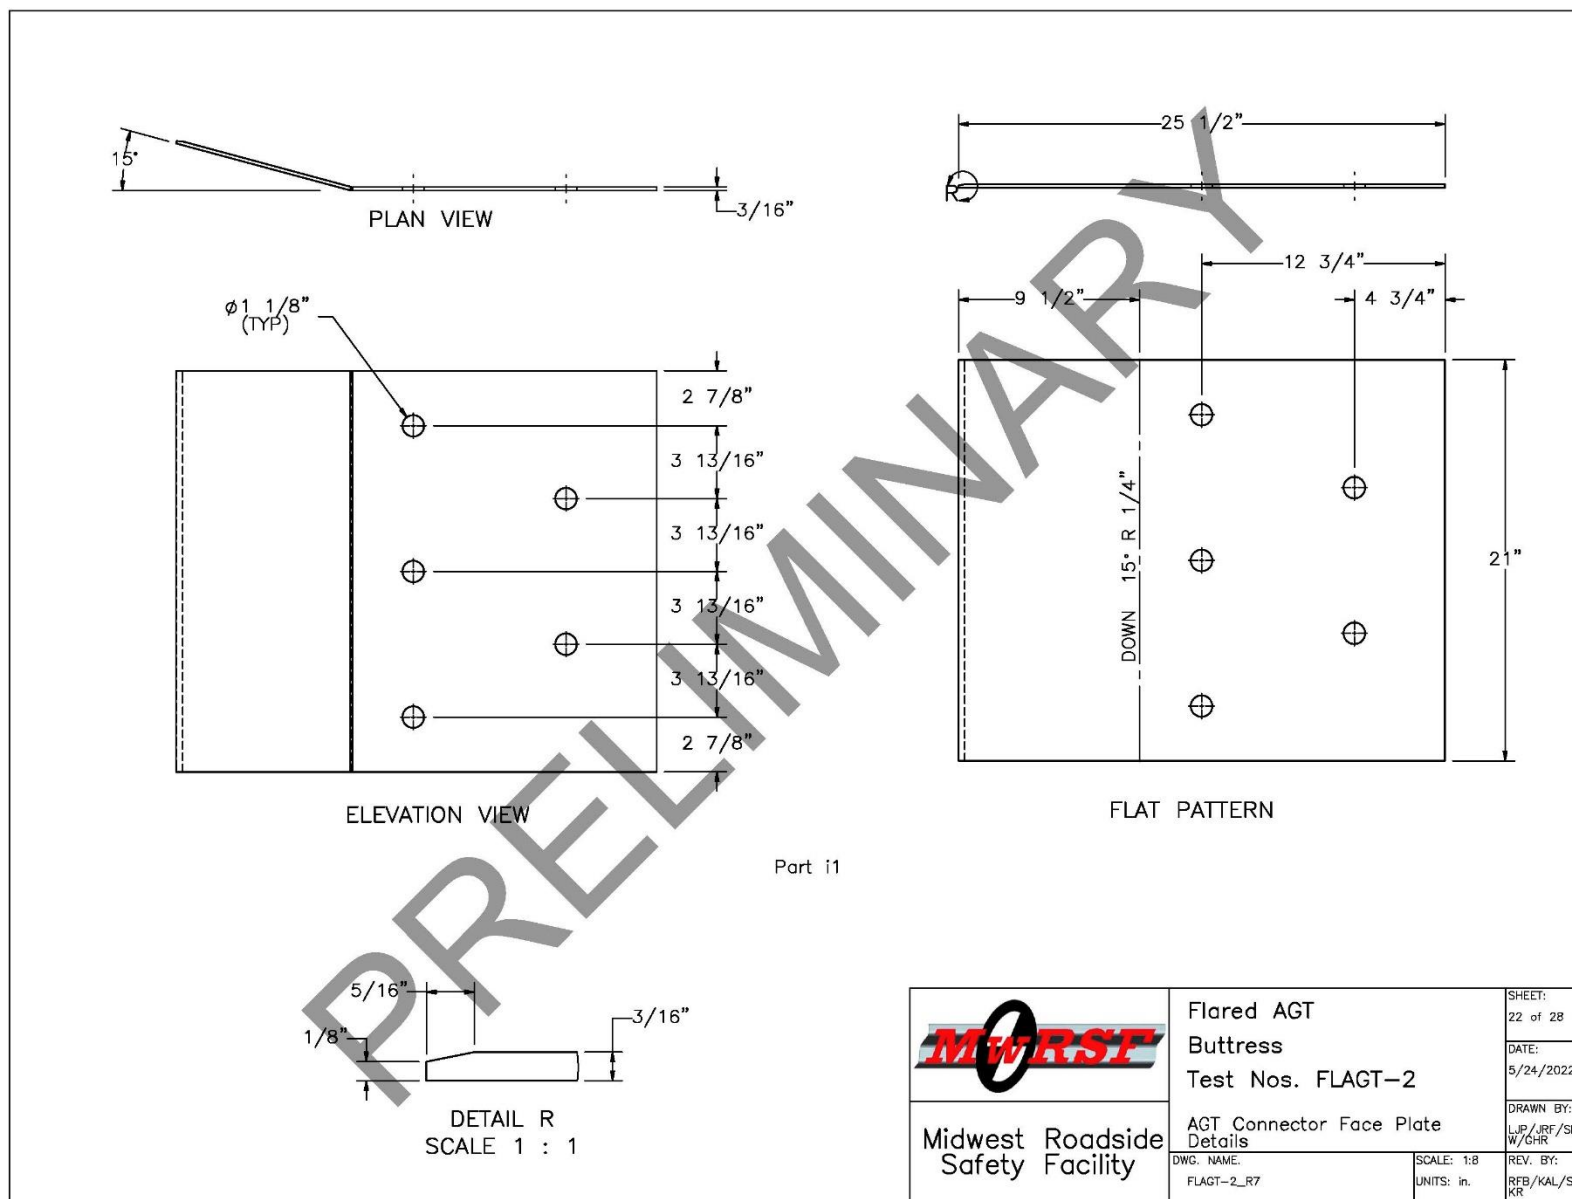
AGT Connector Face Plate Details, Test No. FLAGT-2
